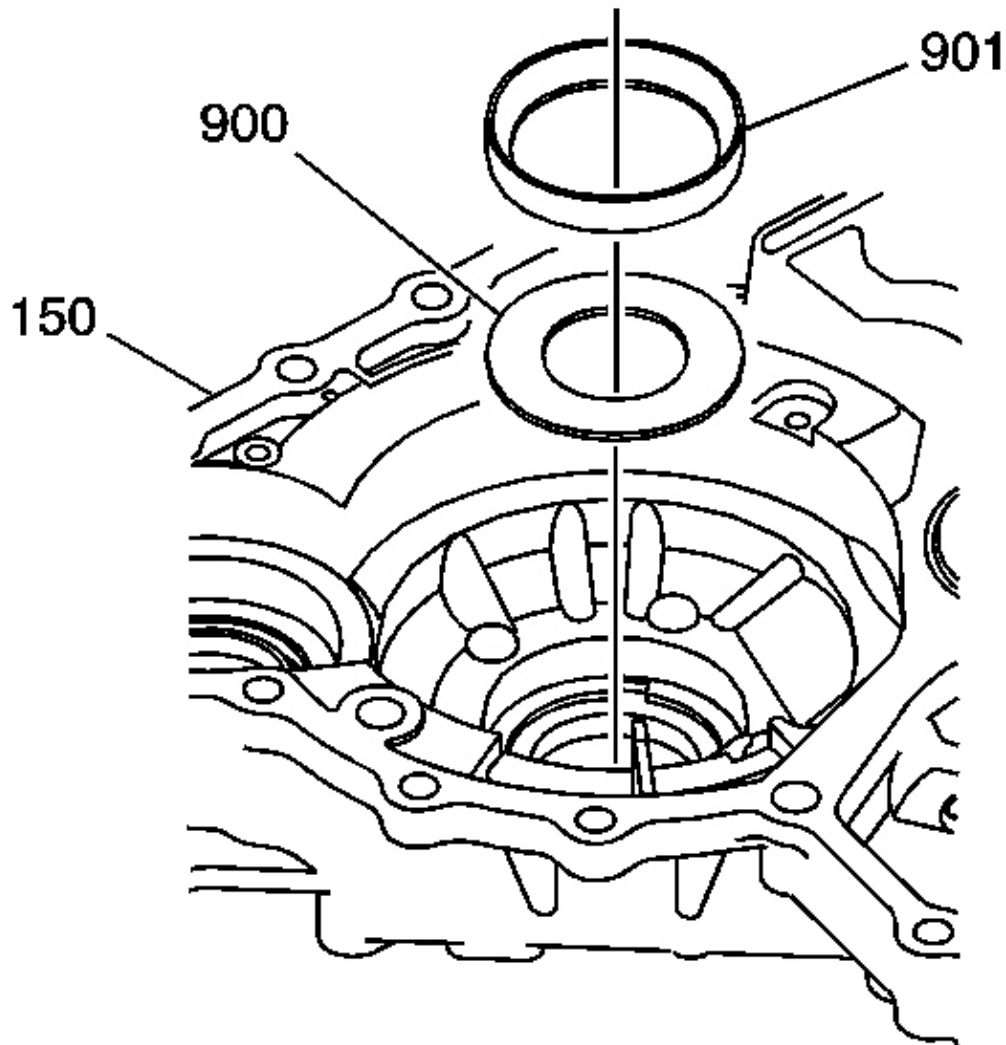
Front Bearing Race Spacer & Front Roller Bearing
